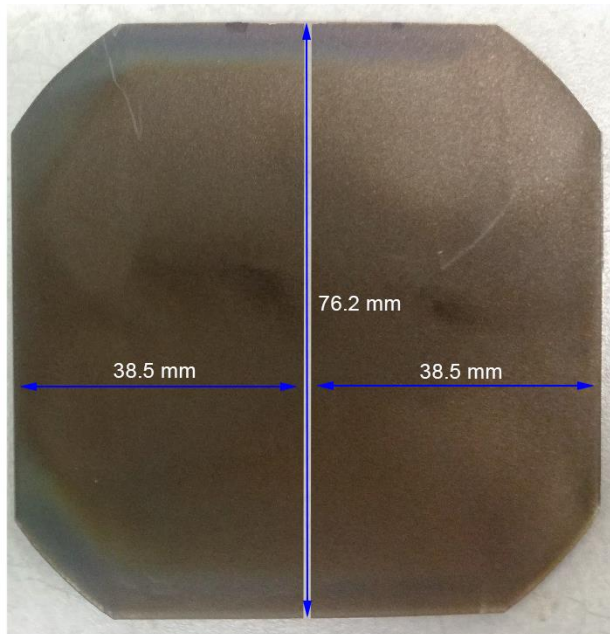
Sheets cut from NiTi bar, used as welding coupons in this study.
